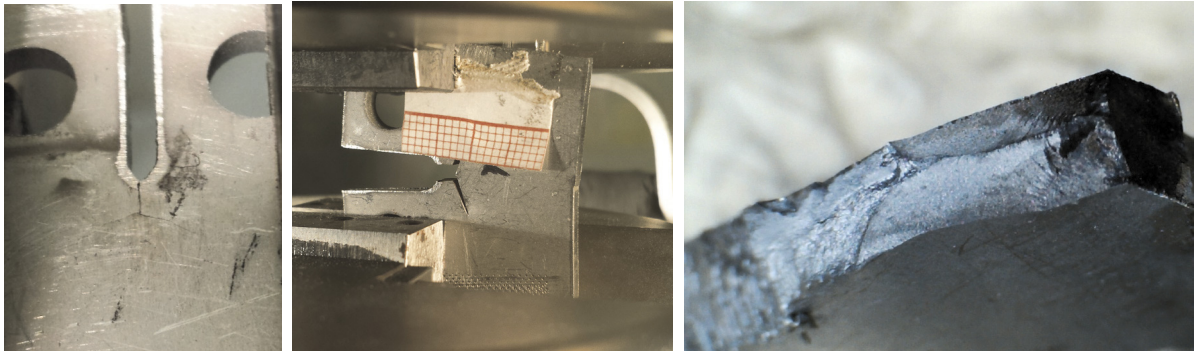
CT specimen under torsional loading ($R=-1$): crack branch and overall view of a typical fracture surface obtained.
